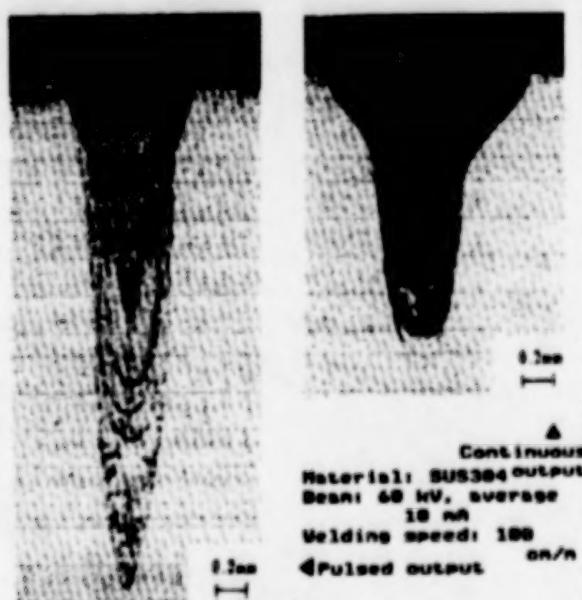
Beads Formed by Pulsed Electron Beam Welding
